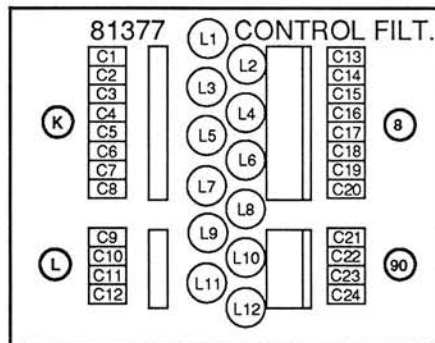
81377 CONTROL FILTER BOARD COMPONENT LAYOUT
